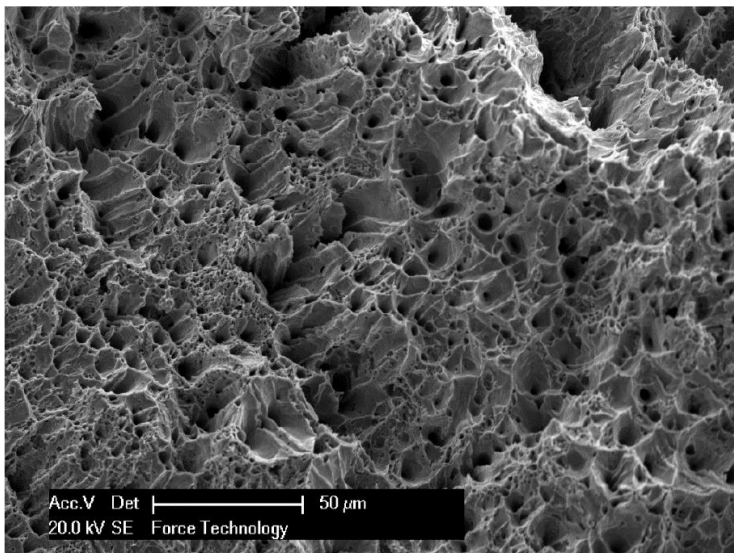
SEM micrograph of aft right hand steering rod fracture surface displaying ductile fracture confirmed by shear dimples.
